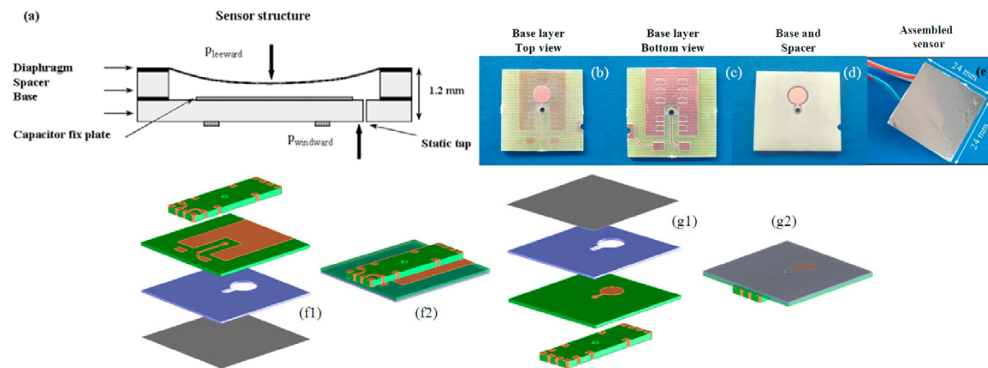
(a) Sensor cross section, (b) base layer top view, (c) base layer bottom view, (d) base and spacer layer assembled, (e) assembled sensor. (f) Exploded and, (g) assembled triple layer structure.
